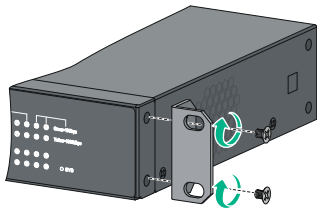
Attaching a two-hole mounting bracket to the rear mounting position on an HPE 5130 24G 4SFP+ EI switch
